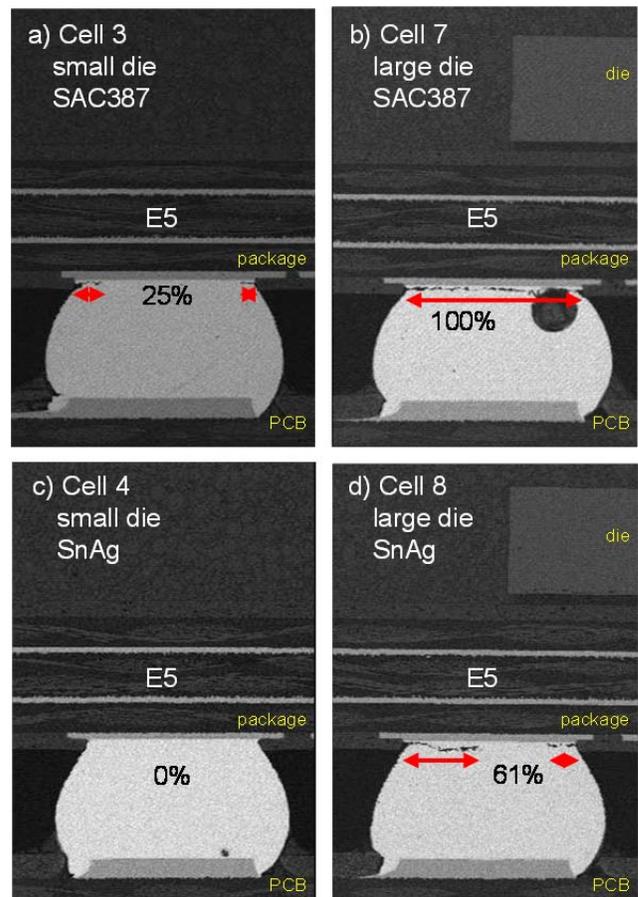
Cross-section of 292MAPBGA solder-joint E5 after 3000 cycles. All with 11mil thick die. Solder-joints in proximity to the die edge (cells 7 and 8) had larger cracks.
